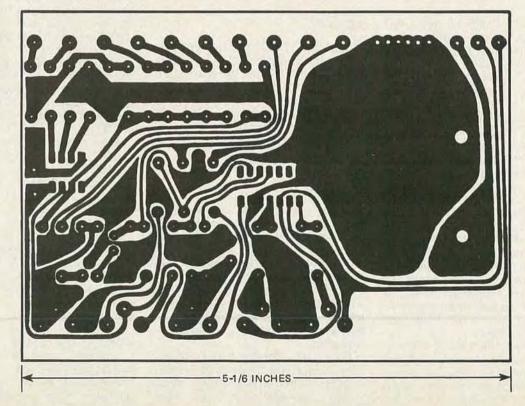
PC BOARD will fit comfortably in a $6\frac{1}{4} \times 3\frac{3}{4}$ -inch box.
